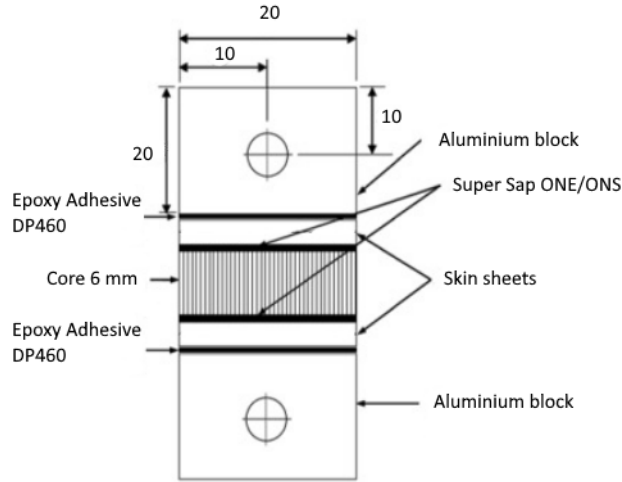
The schematic of the specimens for flat-wise tensile test resembling ASTM C297. All dimensions are in millimeters.
